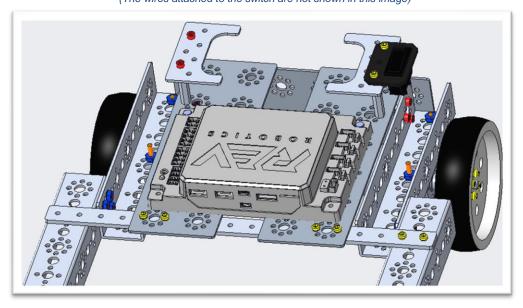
Assembled view (The wires attached to the switch are not shown in this image)
